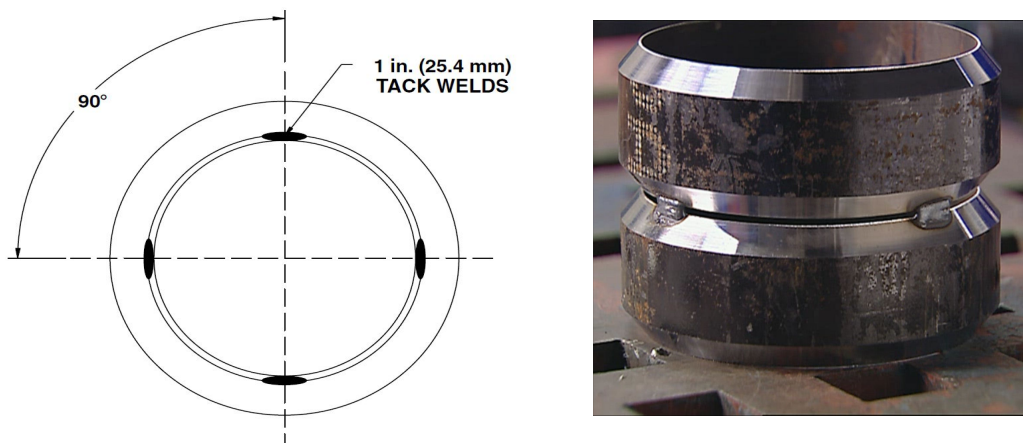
Tack welding of SS400 Pipe
